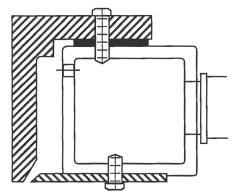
Cross section of mould fabricated from an aluminum extrusion.
